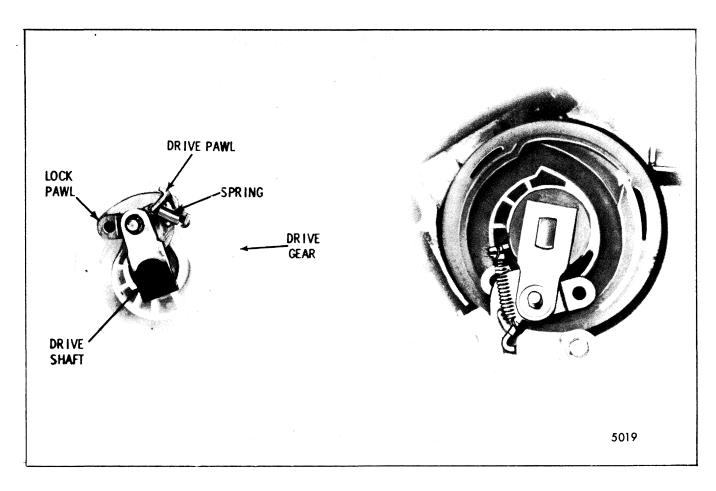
Lock Pawl and Drive Pin Positioning
